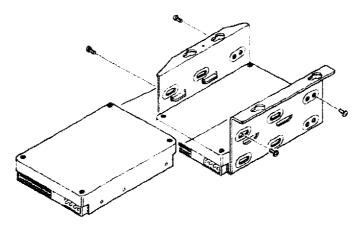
Installing a second Hard Disk Drive in the Mounting Tray
